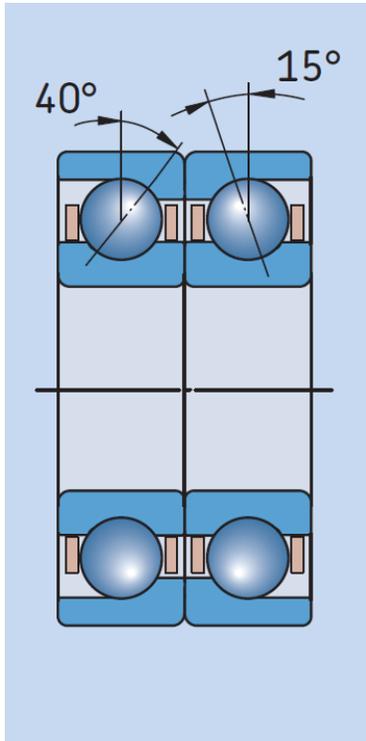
Angular contact bearing pair with dissimilar contact angles (Courtesy of SKF, 1995, *Bearings in Centrifugal Pumps Application Handbook*, © SKF Group)
